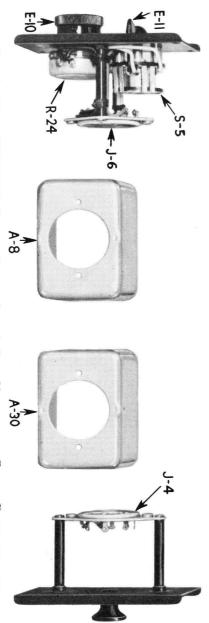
TYPE CBY-23154 SWITCH PANEL (LEFT), SIDE VIEW, WITH COVER REMOVED, AND TYPICAL SWITCH PANEL ADAPTER (RIGHT), SIDE VIEW, WITH COVER REMOVED (Type CBY-49107 and Type CBY-49109 Switch Panel Adapters are identical and are shown on the right as a "typical" switch panel adapter)
